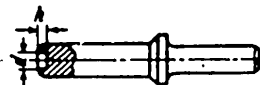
Dies for Riveting Plankings on Semiopen Profiles by the Direct Riveting Method
